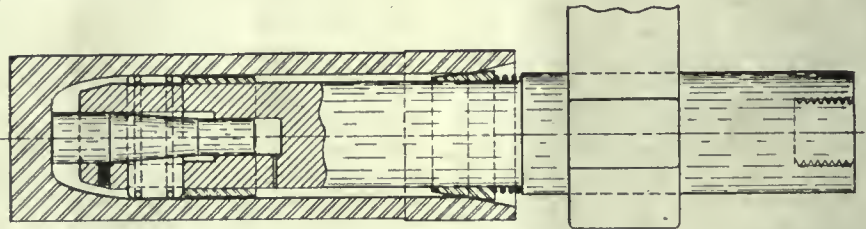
FIXTURE FOR SPLITTING RING APART.
